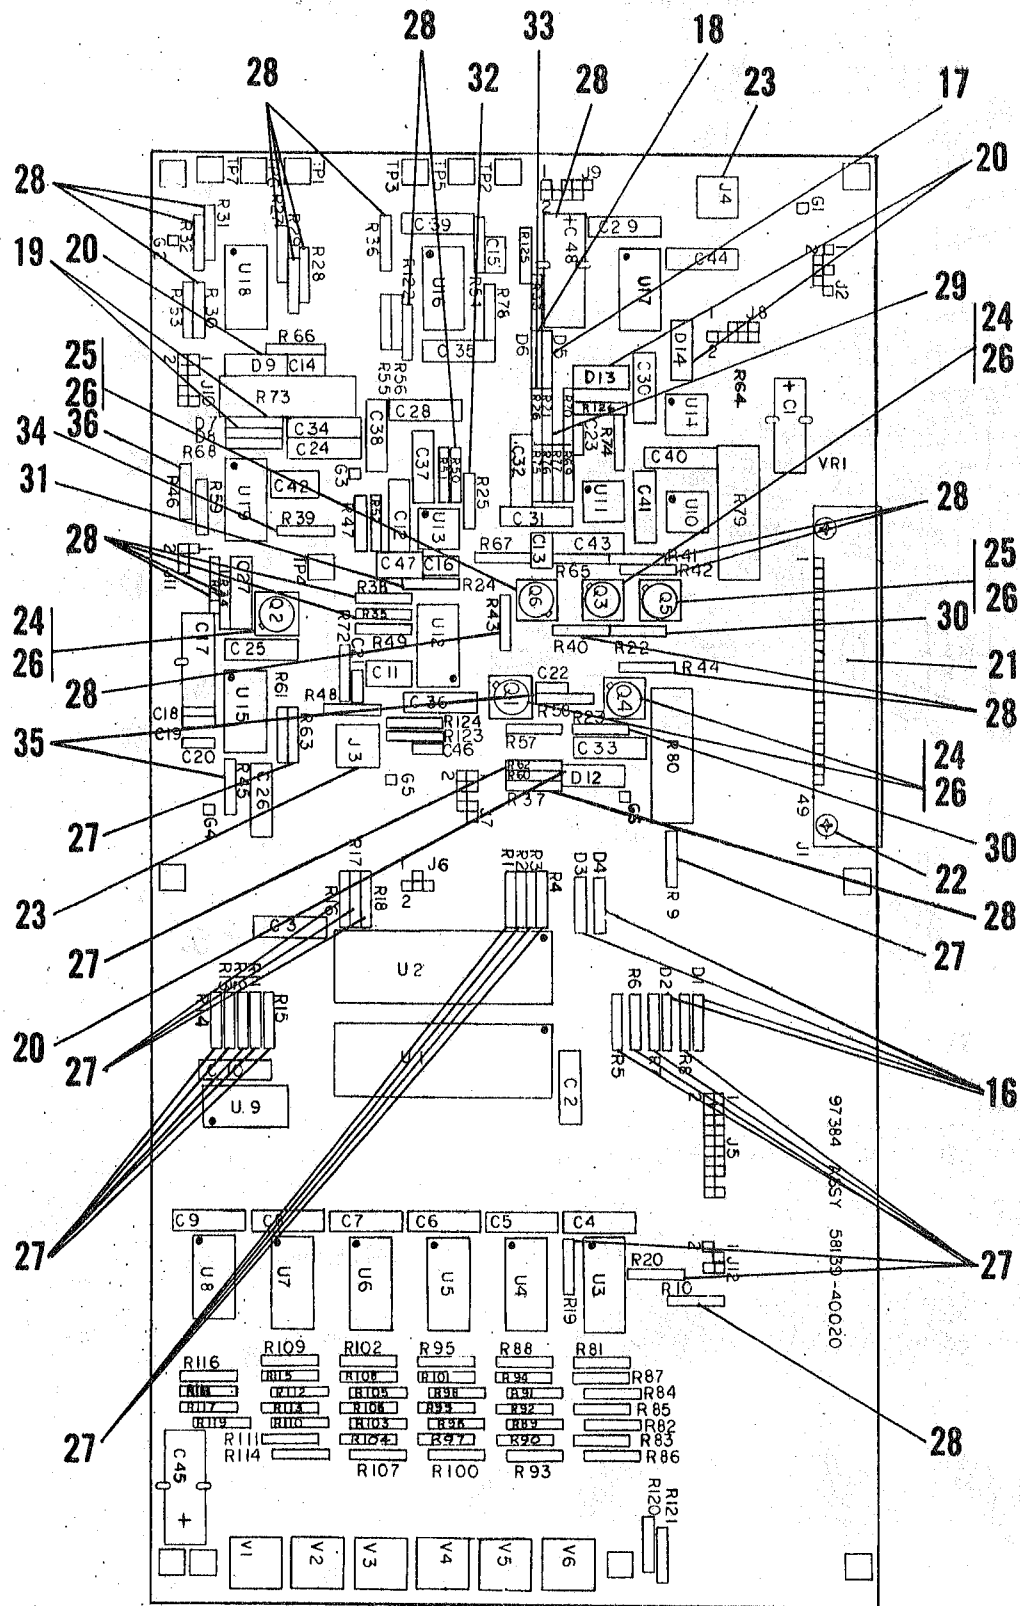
Circuit Card Assembly, Front Panel Interface (Sheet 2 of 4)
